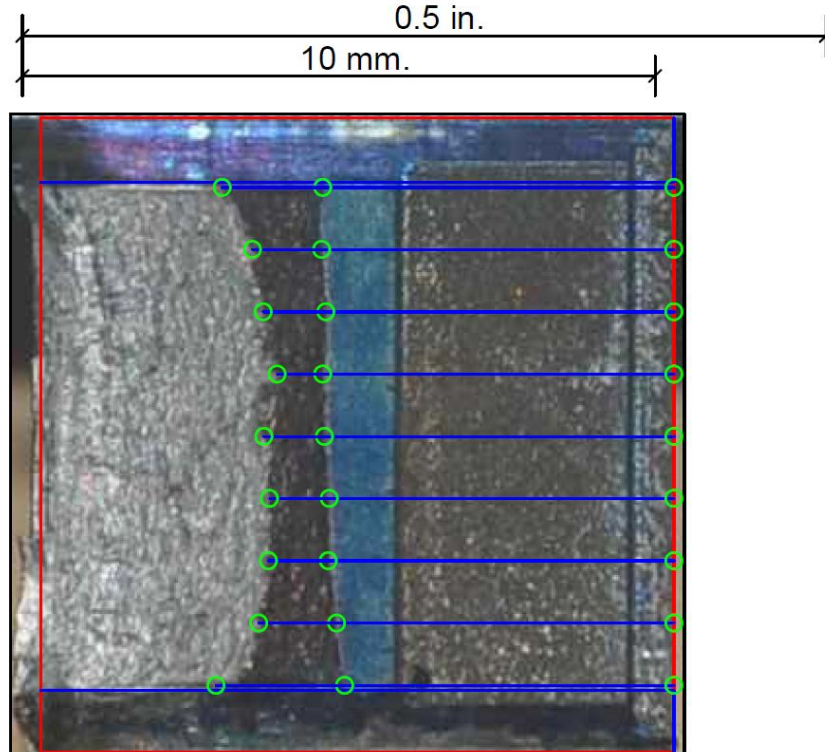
Specimen D17' Fracture Surface
